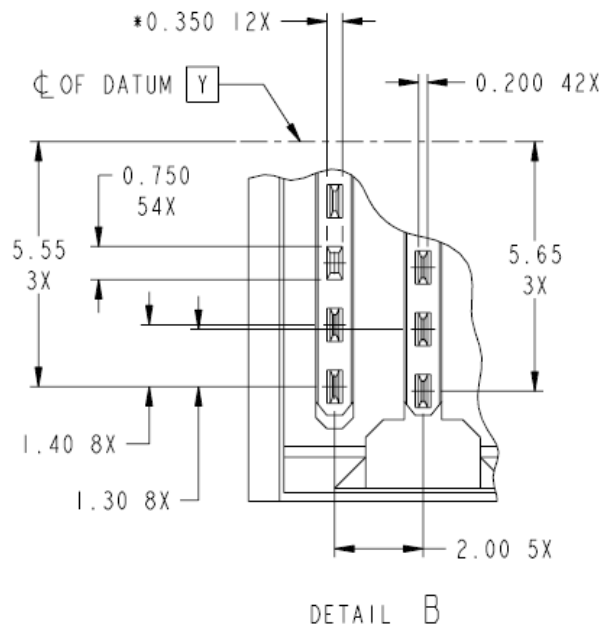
SBBMI Canister Signal Header Dimensions<sup>2</sup>
